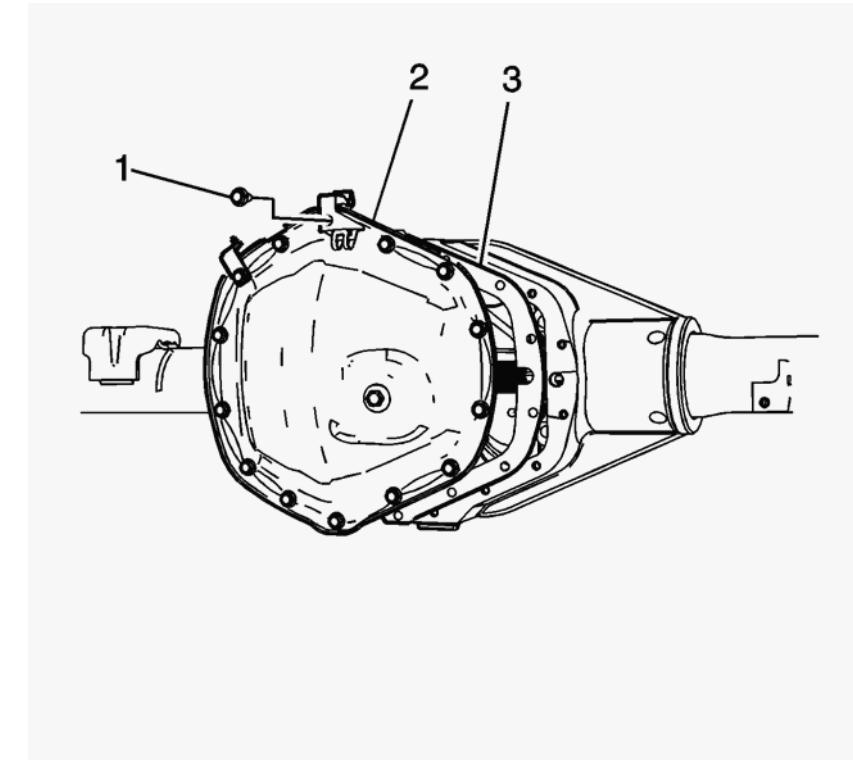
Rear Axle Cover Bolts, Cover And Gasket
